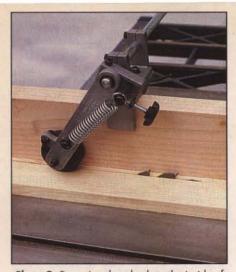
Photo G: Reversing the wheels to the inside of the arm enables the Leichtung system to make extremely narrow rip cuts. Blade guard, however, must be removed.
